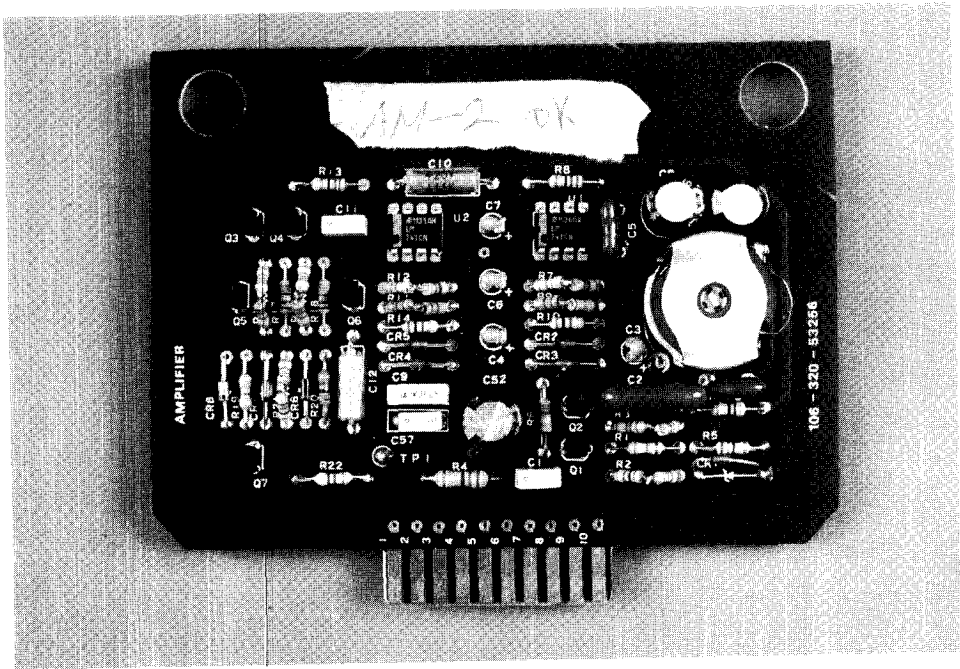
Pre Amp and Hardlimiter PCB (CH2)
